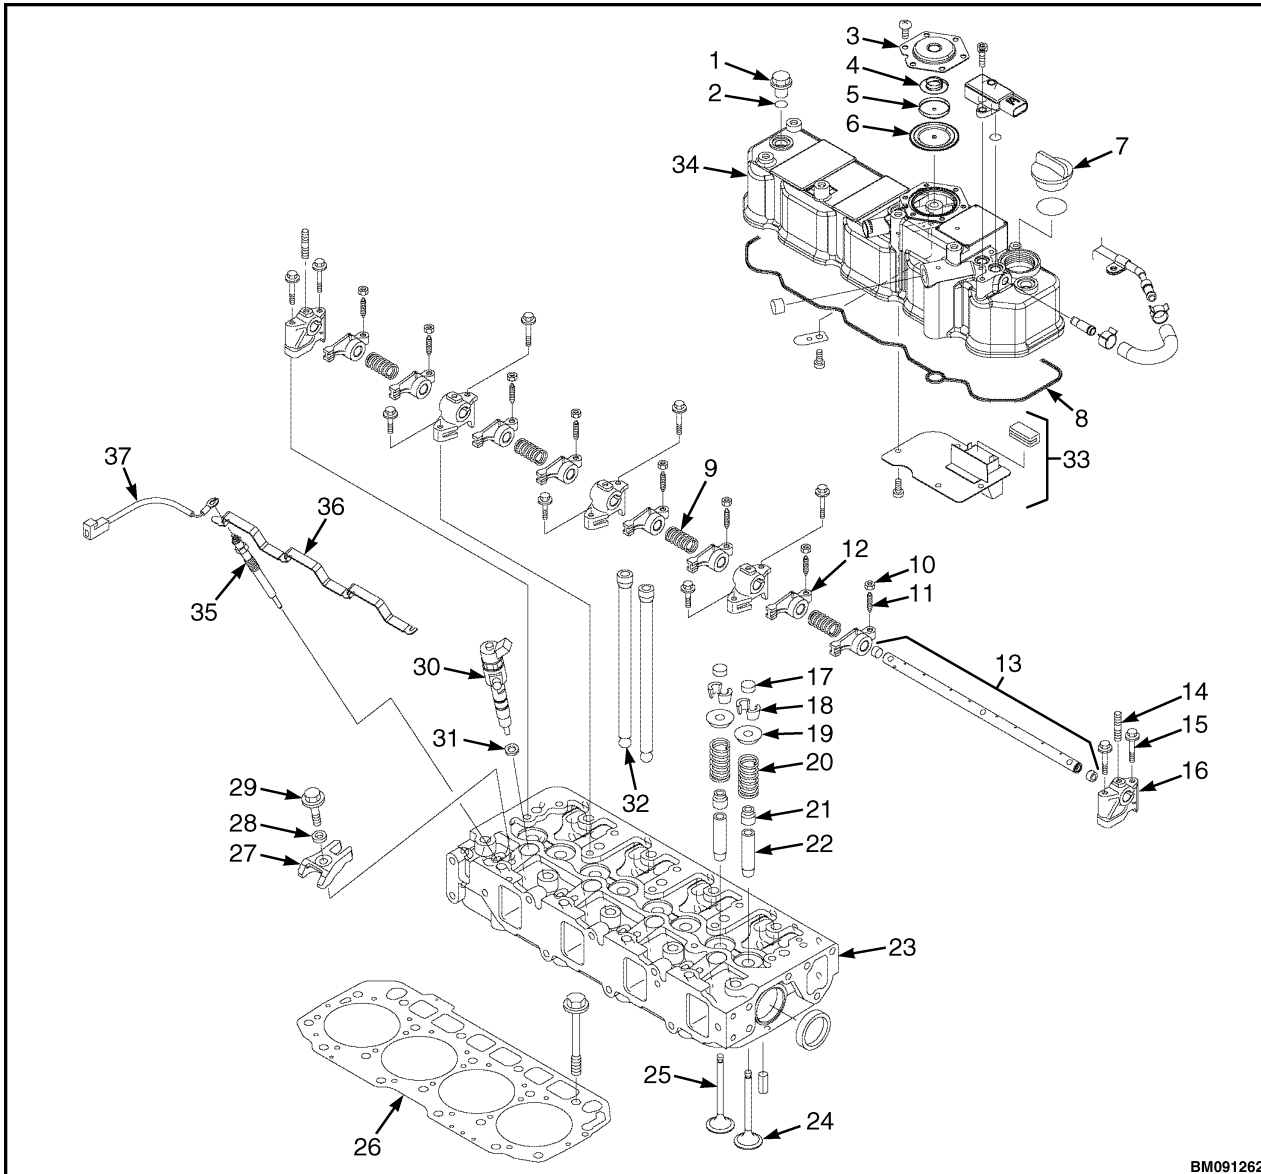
Cylinder head components (Yanmar 2.1L diesel engines)
